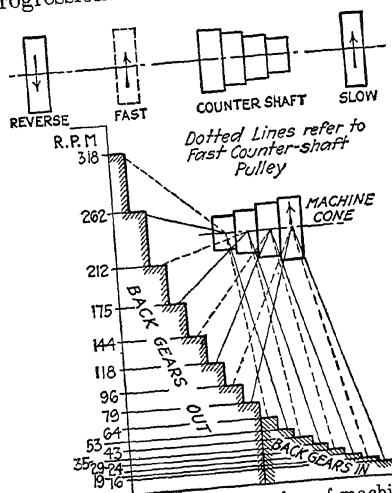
Illustrates geometrical progression of machine spindle speeds.
